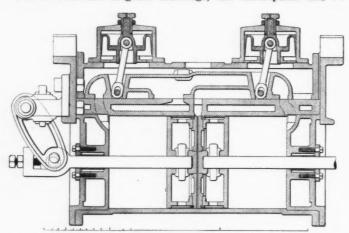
Section of Cylinder and Valve Chest. 1834 Design.
